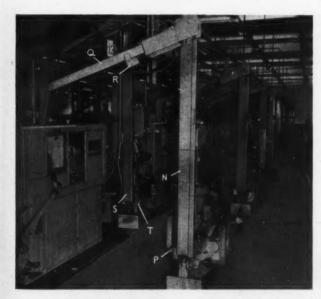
In this view along the central gangway may be observed the arrangement of the automatic feed equipment that delivers the components to the machines. This equipment was built by the company
